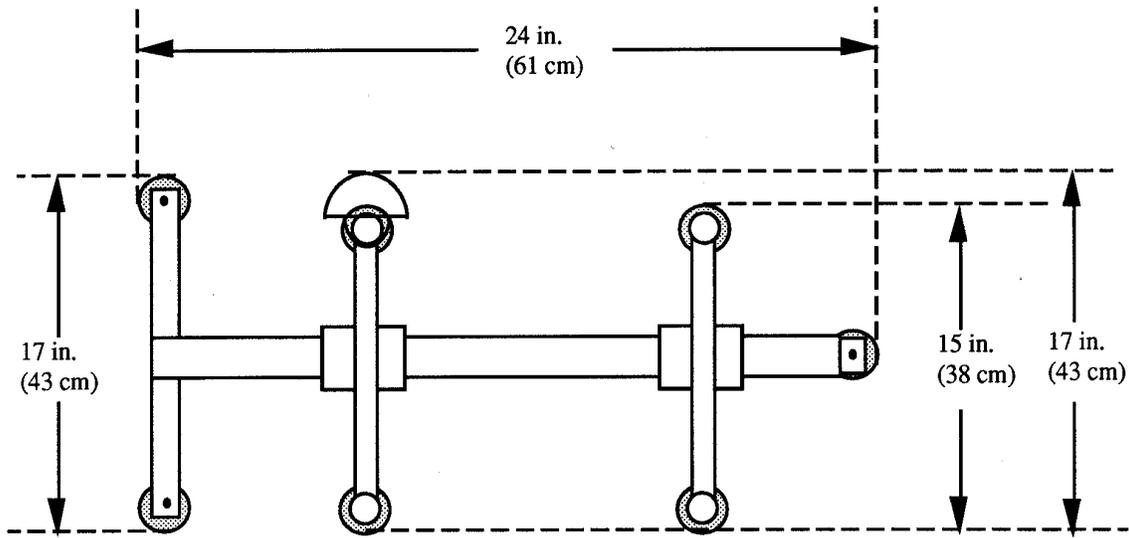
ROBOT DIMENSIONS (OVERHEAD VIEW)
